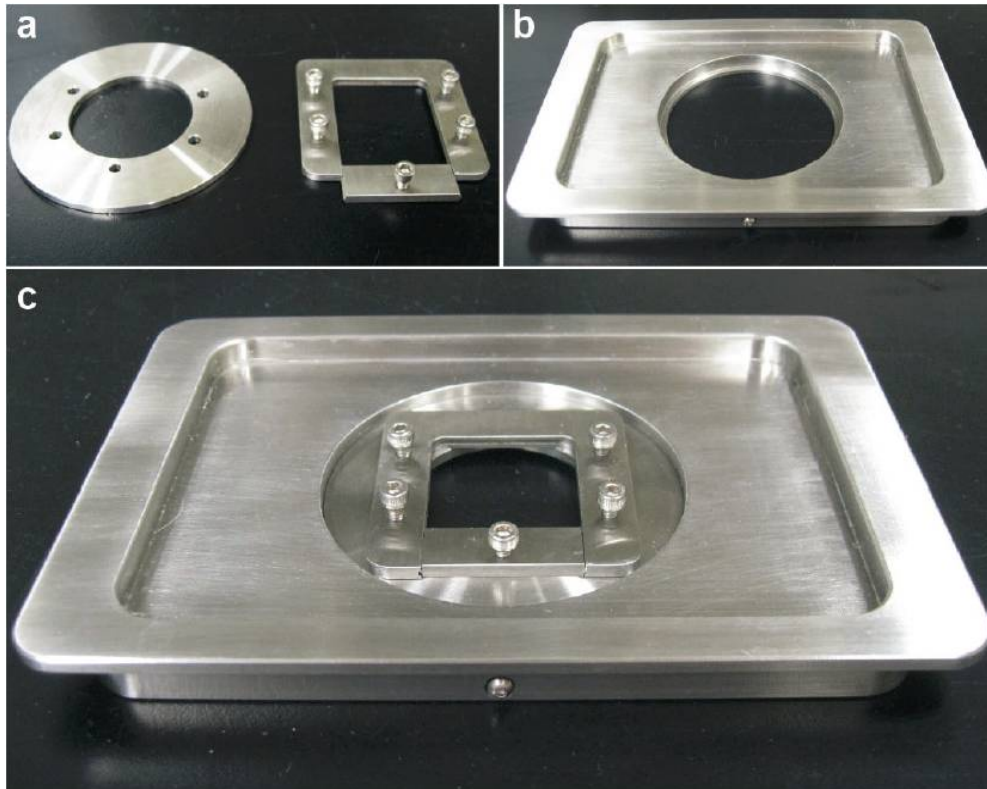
The final prototype of the rat imaging window. (a) The u-shape holder to lock the inner window and the ring holder to connect the u-shape holder to the stage. (b) The plate that holds the animal. It will be inserted to the microscope sample stage. (c) The imaging window with all parts assembled.
